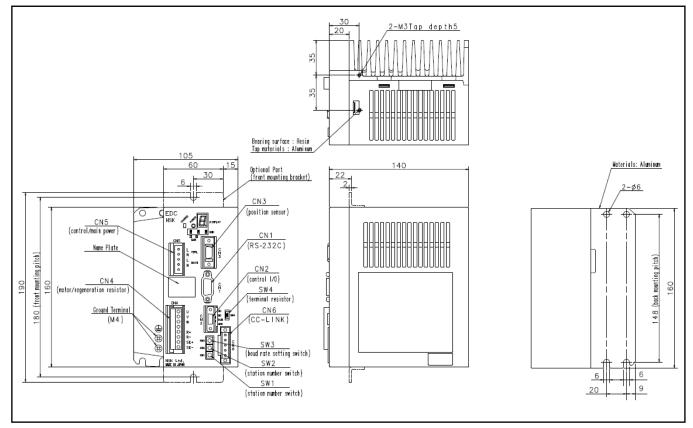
EDC Driver Unit for PX3050 type Motor
